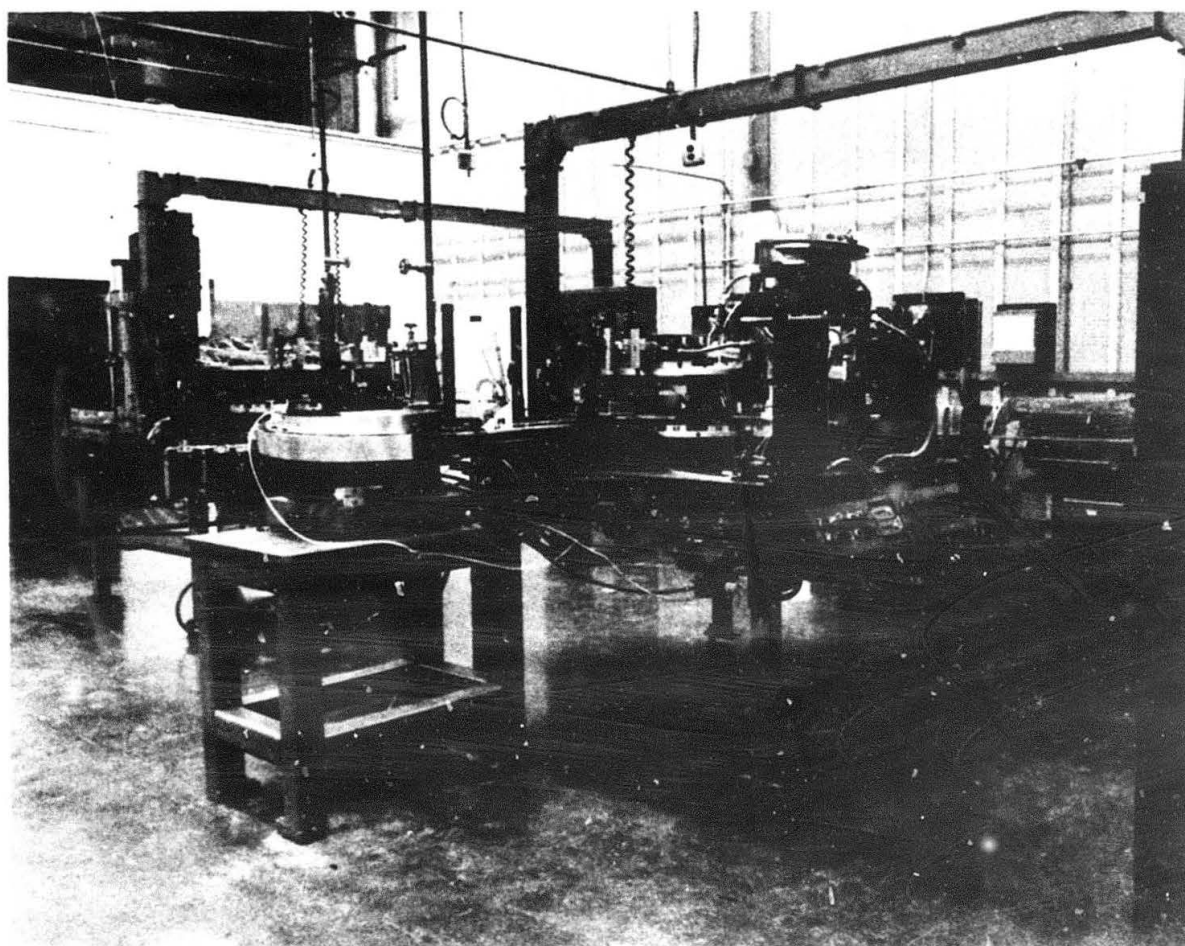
ESCAPEMENT SUB-ASSEMBLY MACHINE
